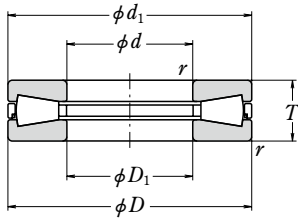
Thrust Tapered Roller Bearing in Heavy Duty Extruder
